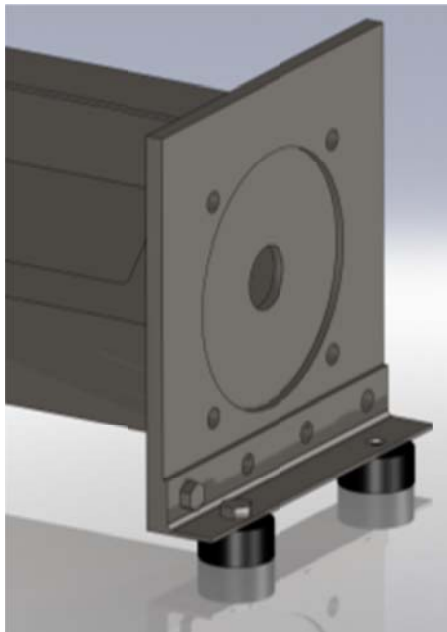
CAD Model Showing Dimensions between Motor Mounting Bolt Hole and the Next Surface
